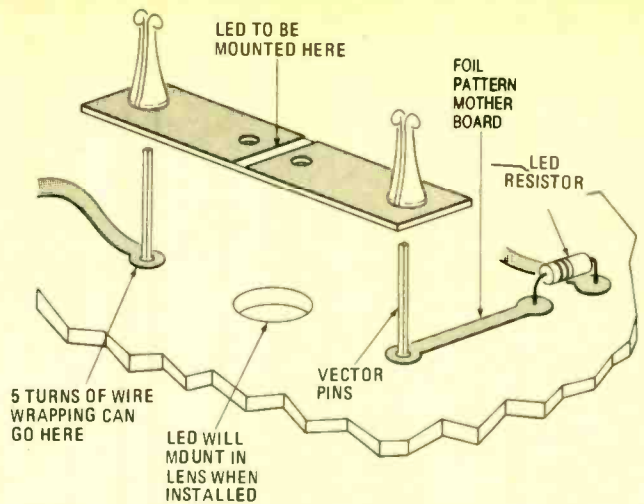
HOW LED MOUNTING STRIP forms a plug-in connector when mated to suitable pins inserted into the PC board.
